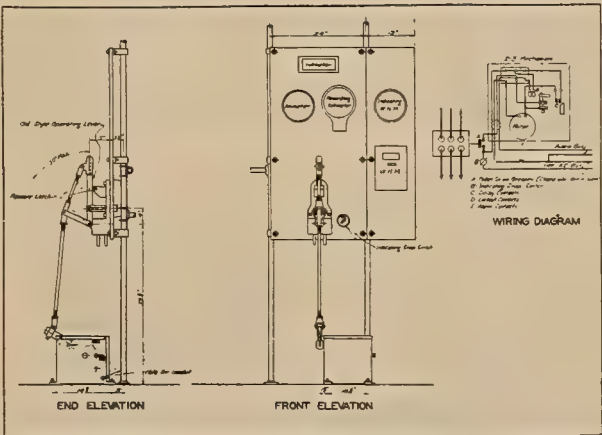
General layout of single-switch, type S-3 automatic reclosing mechanism such as that installed at Paso Robles substation.
